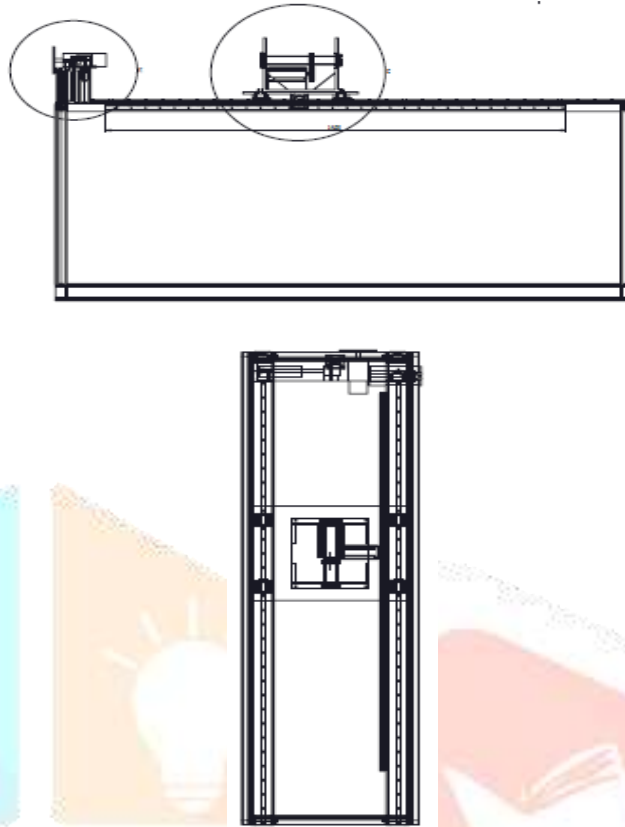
Front View and Top View of the Machine (Drawing on AutoCAD)
